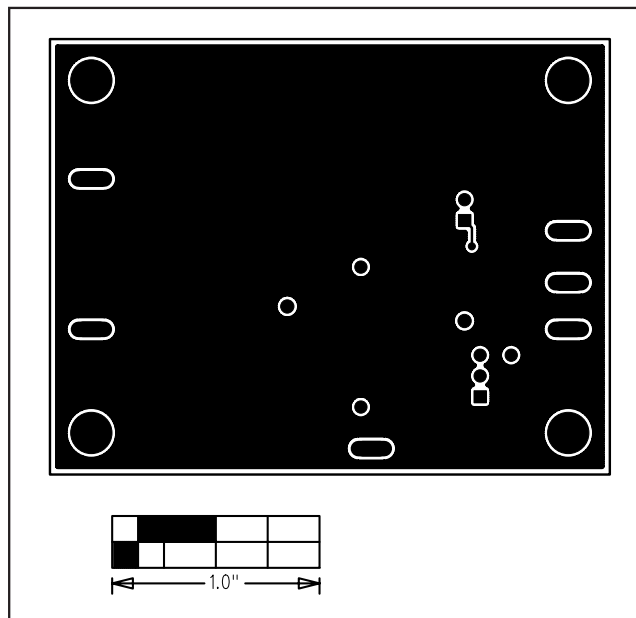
MAX16913A EV Kit PCB Layout—Solder Side
